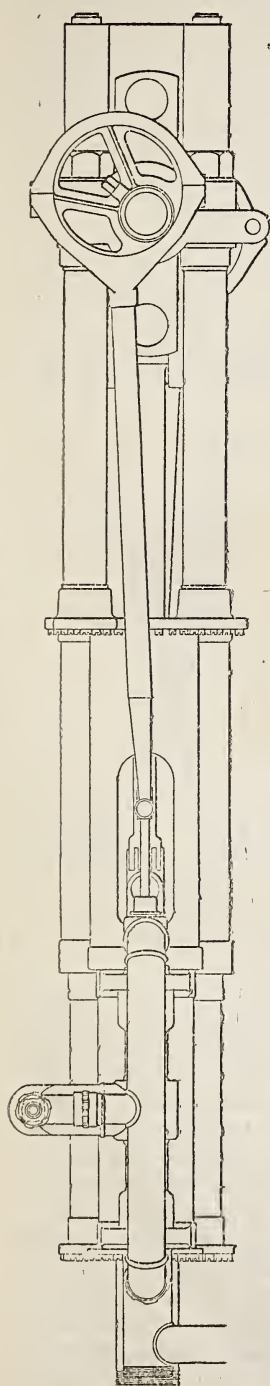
SIDE ELEVATION OF THE ENGINE.
